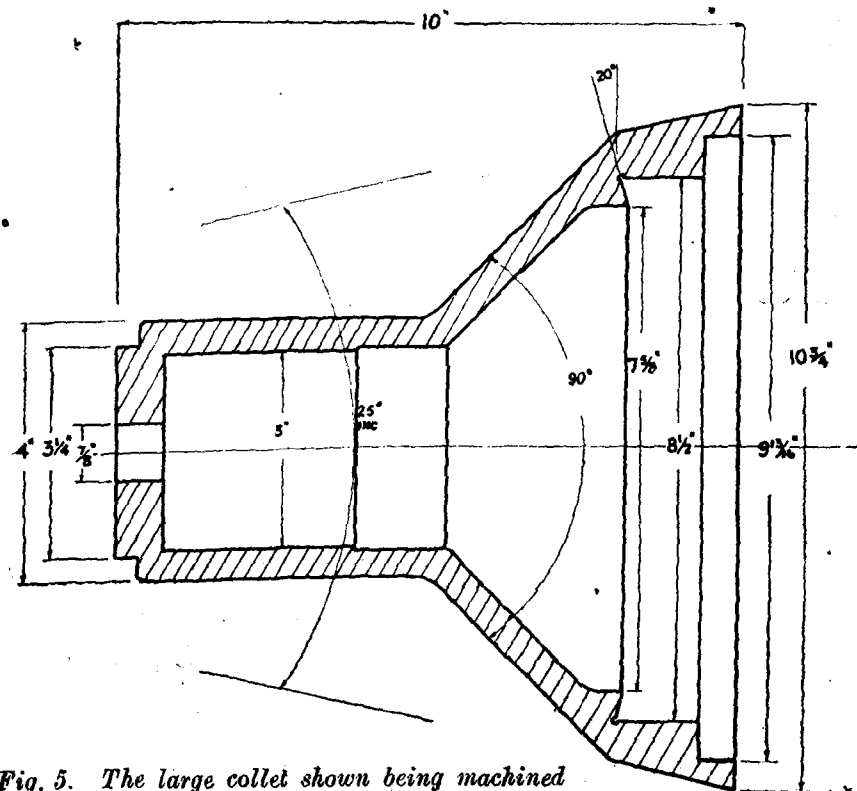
The large collet shown being machined on a Herbert No. 9B Combination Turret Lathe in Fig. 4
